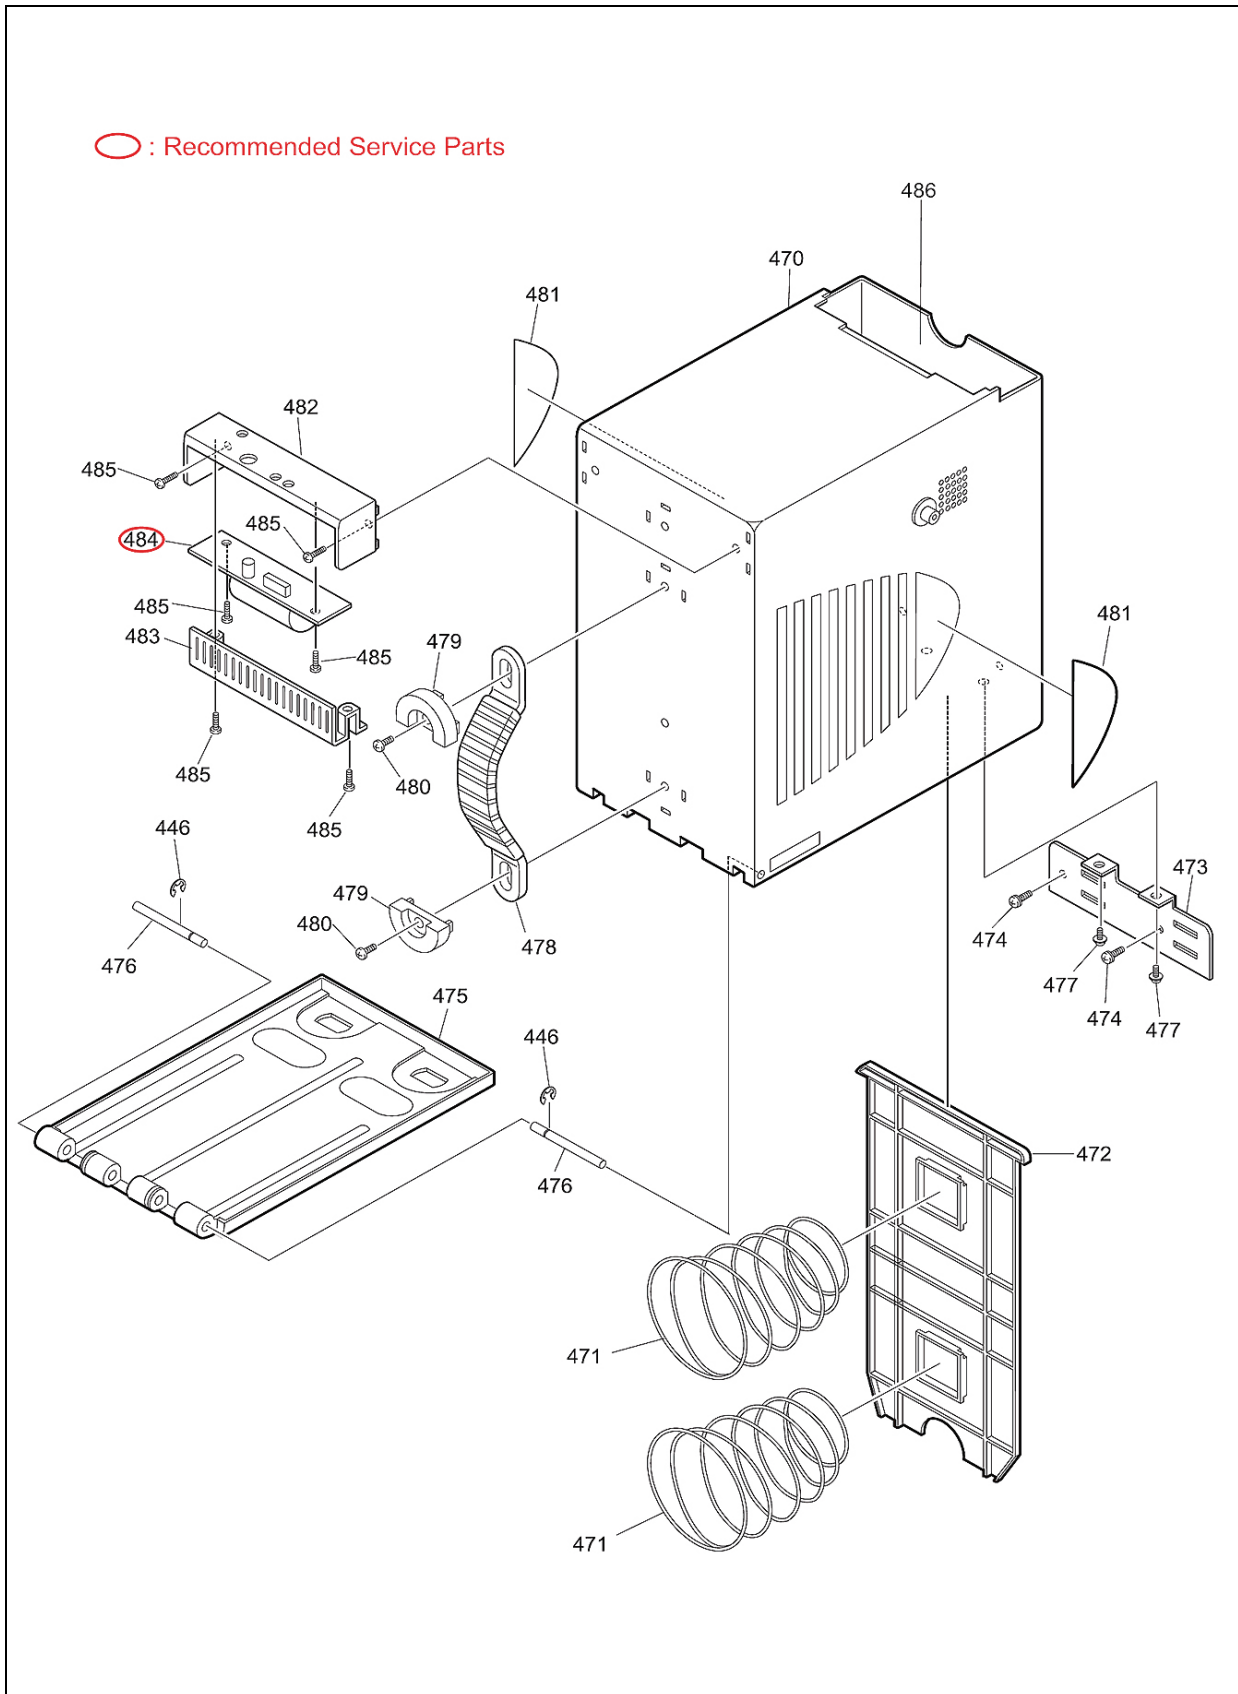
Cash Box Mechanical Exploded View (Part 1)
